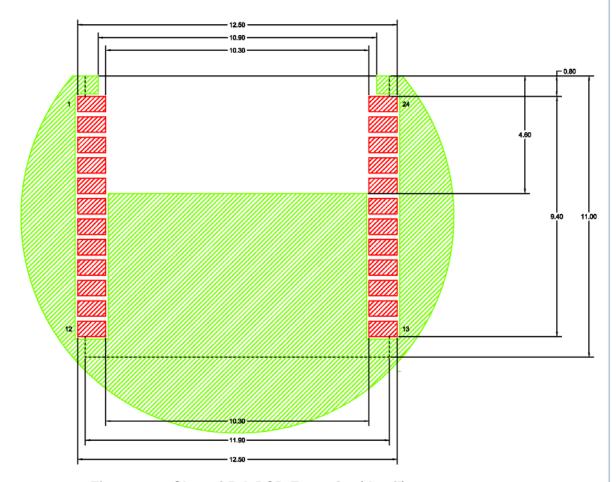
SL876Q5-A PCB Footprint (detail)
